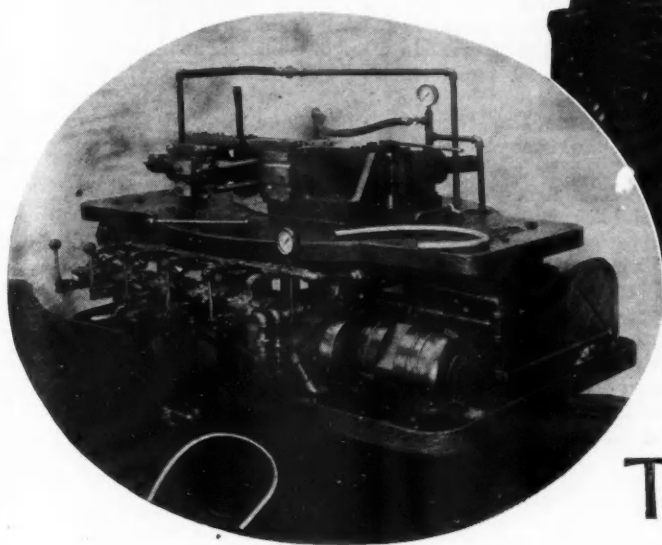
Finishing the U-bend in front seat back frame and robe rail member
